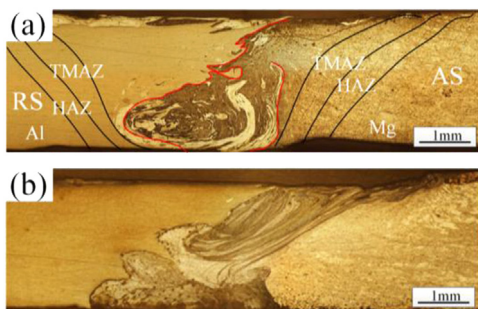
Cross-sectional images of the weld zone of dissimilar AA6061-AZ31 welded joint fabricated by FSW: (a) ultrasonic vibration assisted-FSW and (b) conventional FSW without ultrasonic vibration [104].
